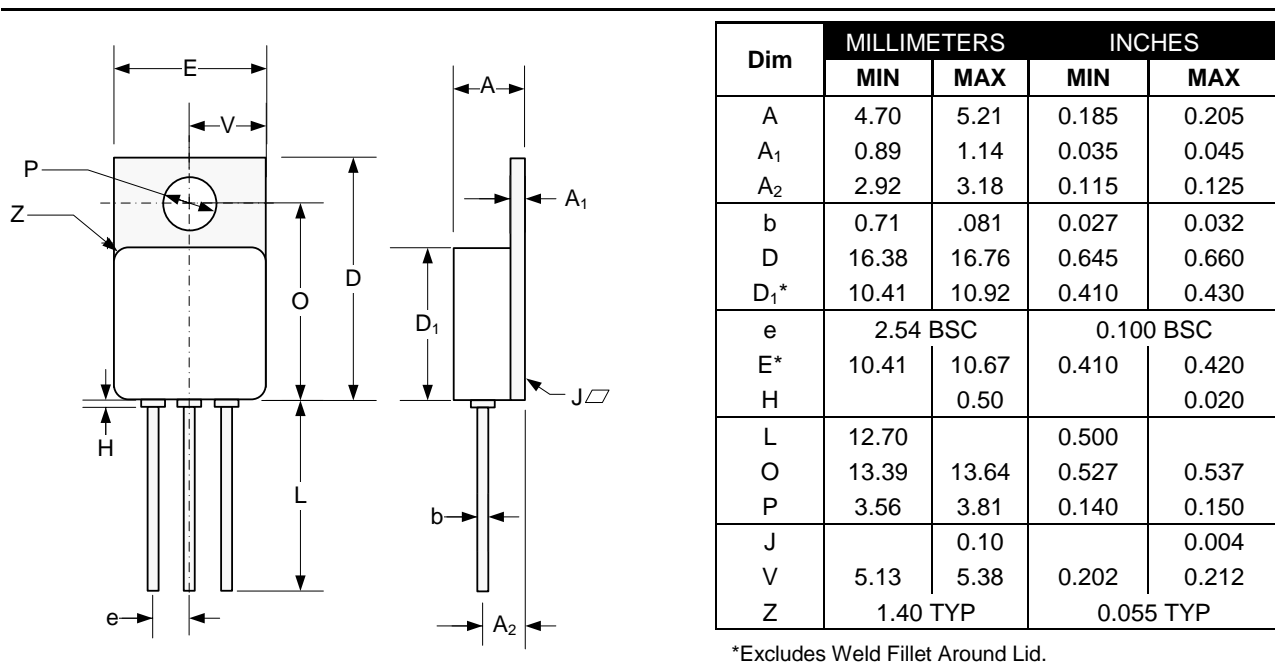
• G/IG 3-Pin Hermetic TO-257 Package Dimensions
